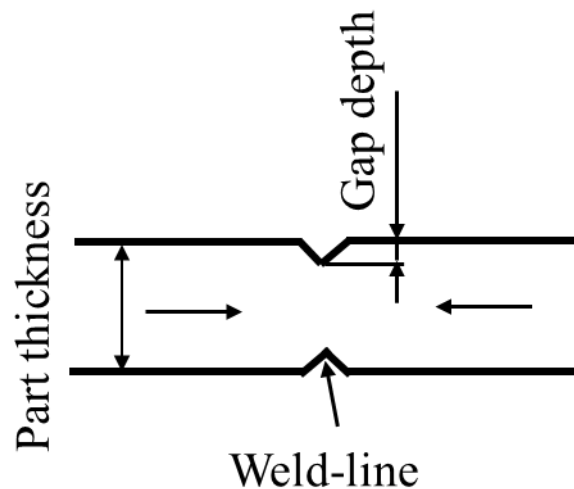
V- Notch due to weld-line⁷⁶⁾
